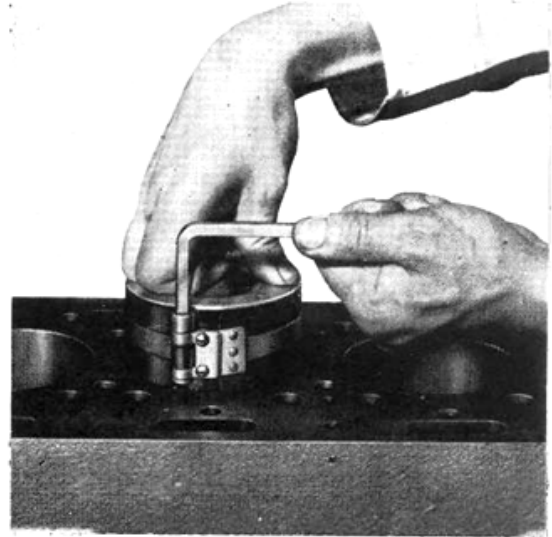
Piston Fitting with aid of an Adjustable Ring Clamp
